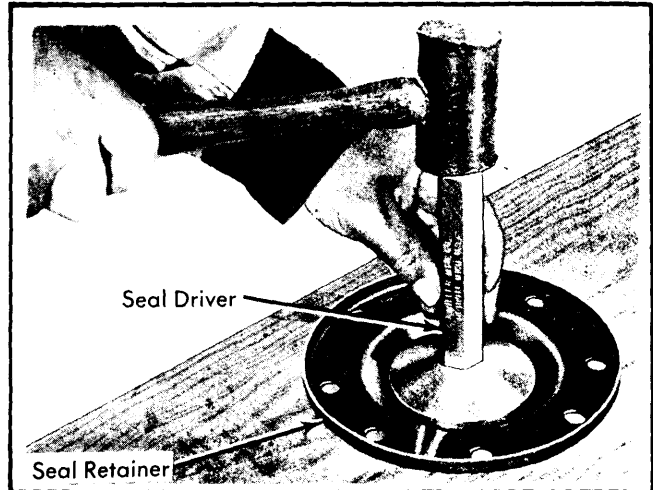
Installing Drive Pinion Oil Seal In Retainer
